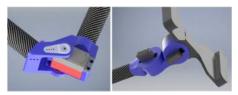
RoboPal's Elbow Joint (left) and Head Assembly (right)
